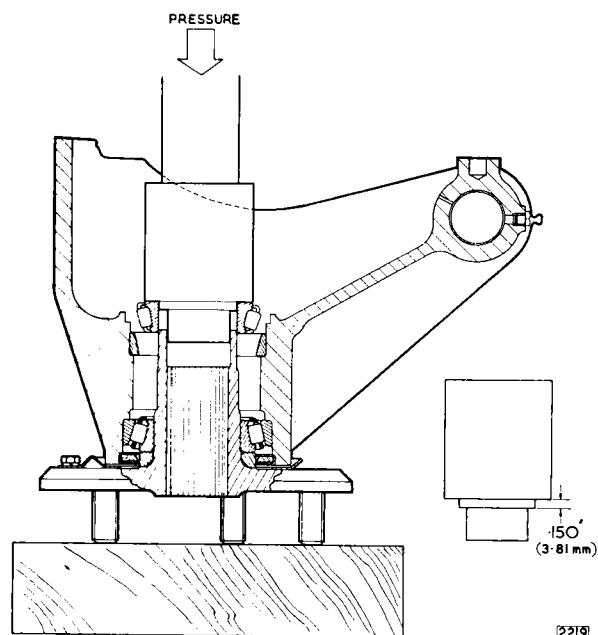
Pressing in the hub inner bearing inner race using the master spacer (Churchill Tool No. J.15)
